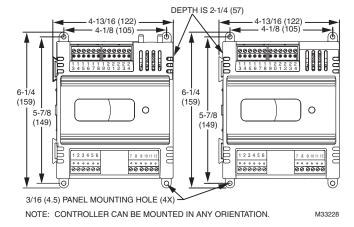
Panel mounting—controller dimensions in inches (mm) for CVB4024NS-VAV1 only.
